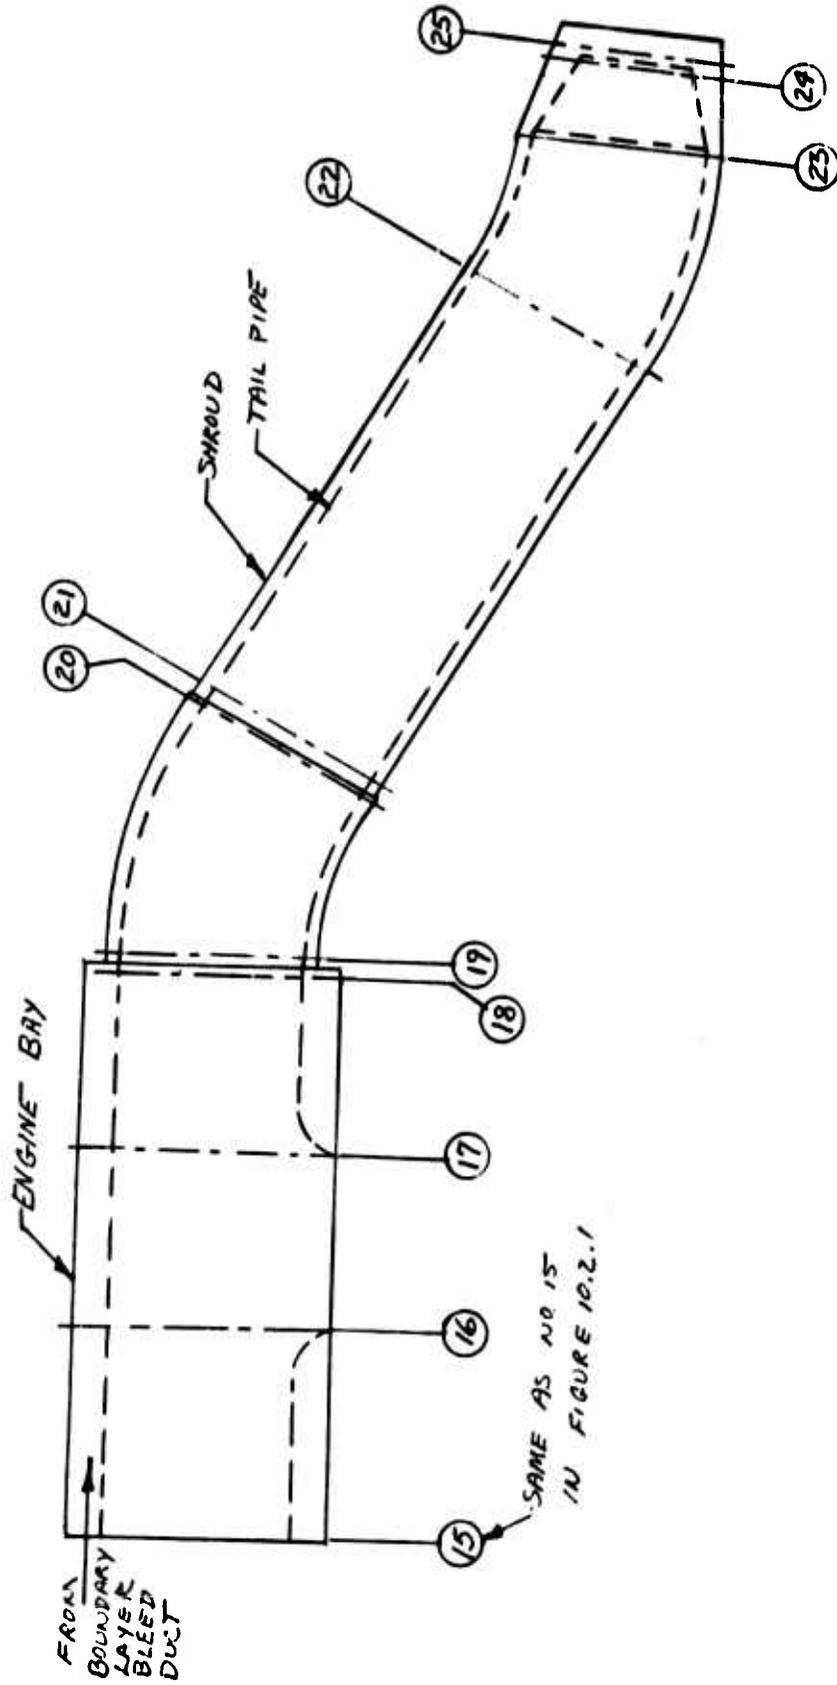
Cooling Air Duct Definition - Engine Bay to Tailpipe Ejector
